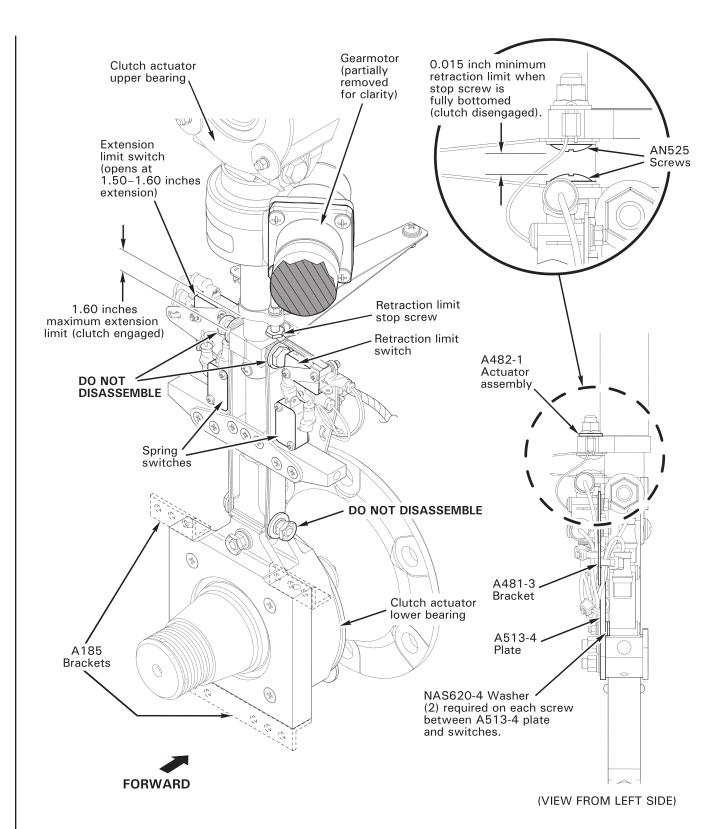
ACTUATOR LIMIT SWITCHES
